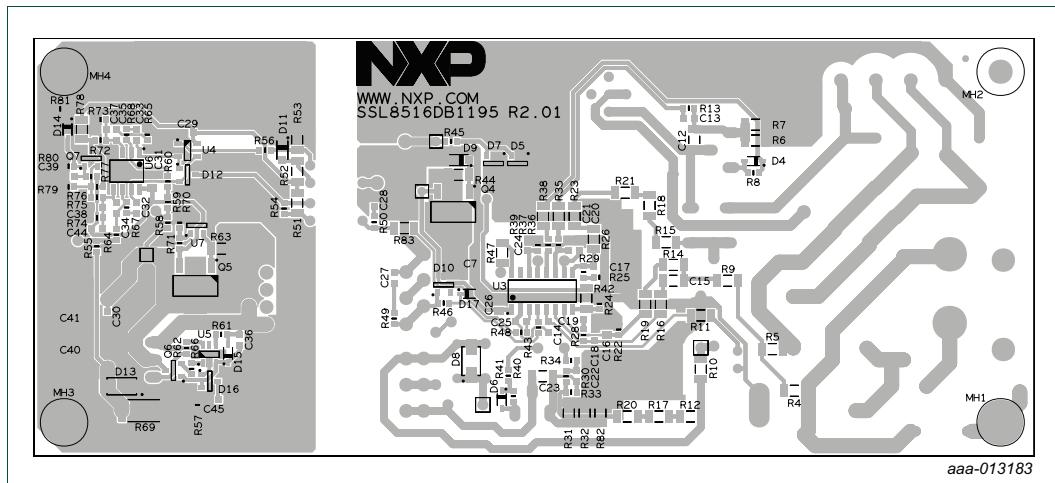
SSL8516BDB1317 demo board: bottom side copper and silk screen
